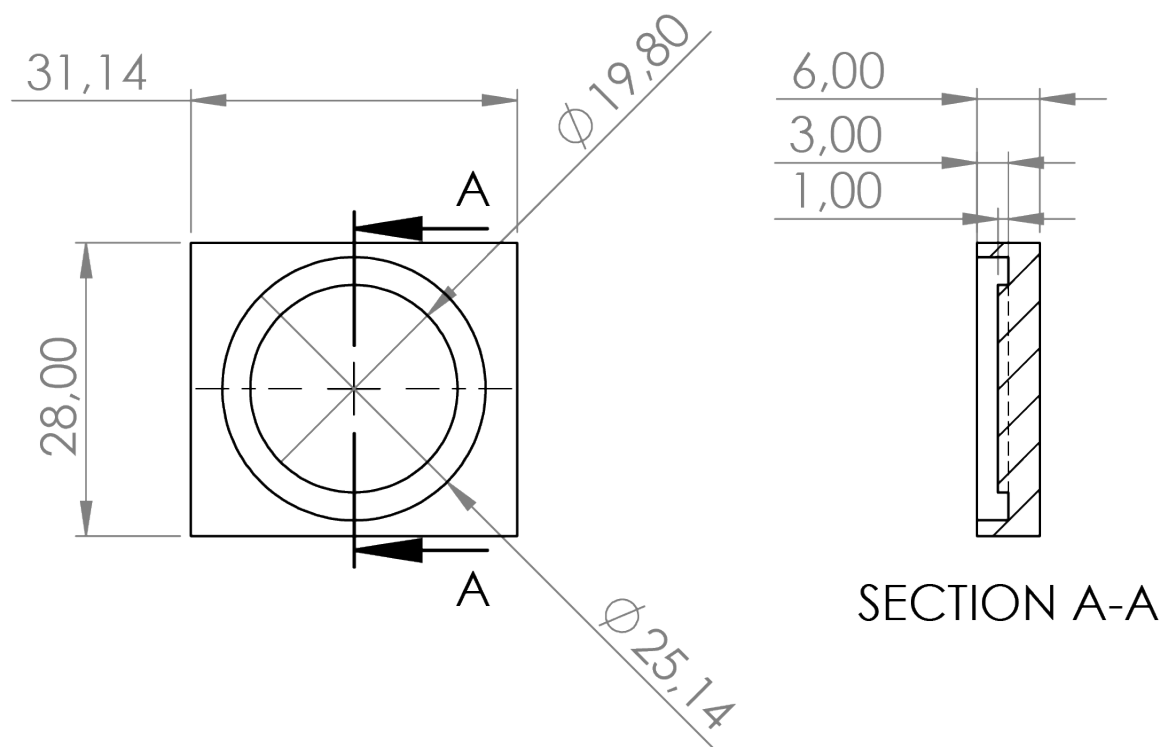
Drawing of the mould used for fabricating the samples used in the cytotoxicity assay. Dimensions are in millimeters (mm).
